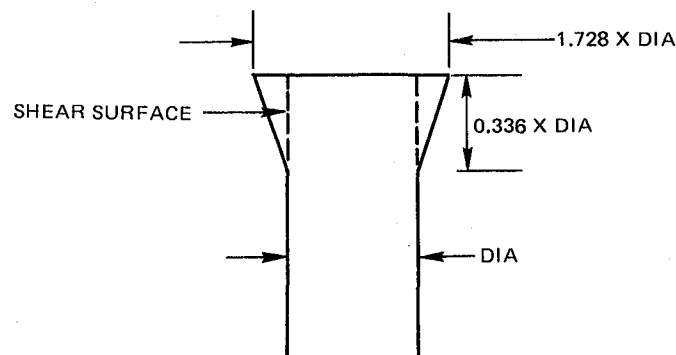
Standard Rivet Configuration used to Calculate Rivet Shear Stress
